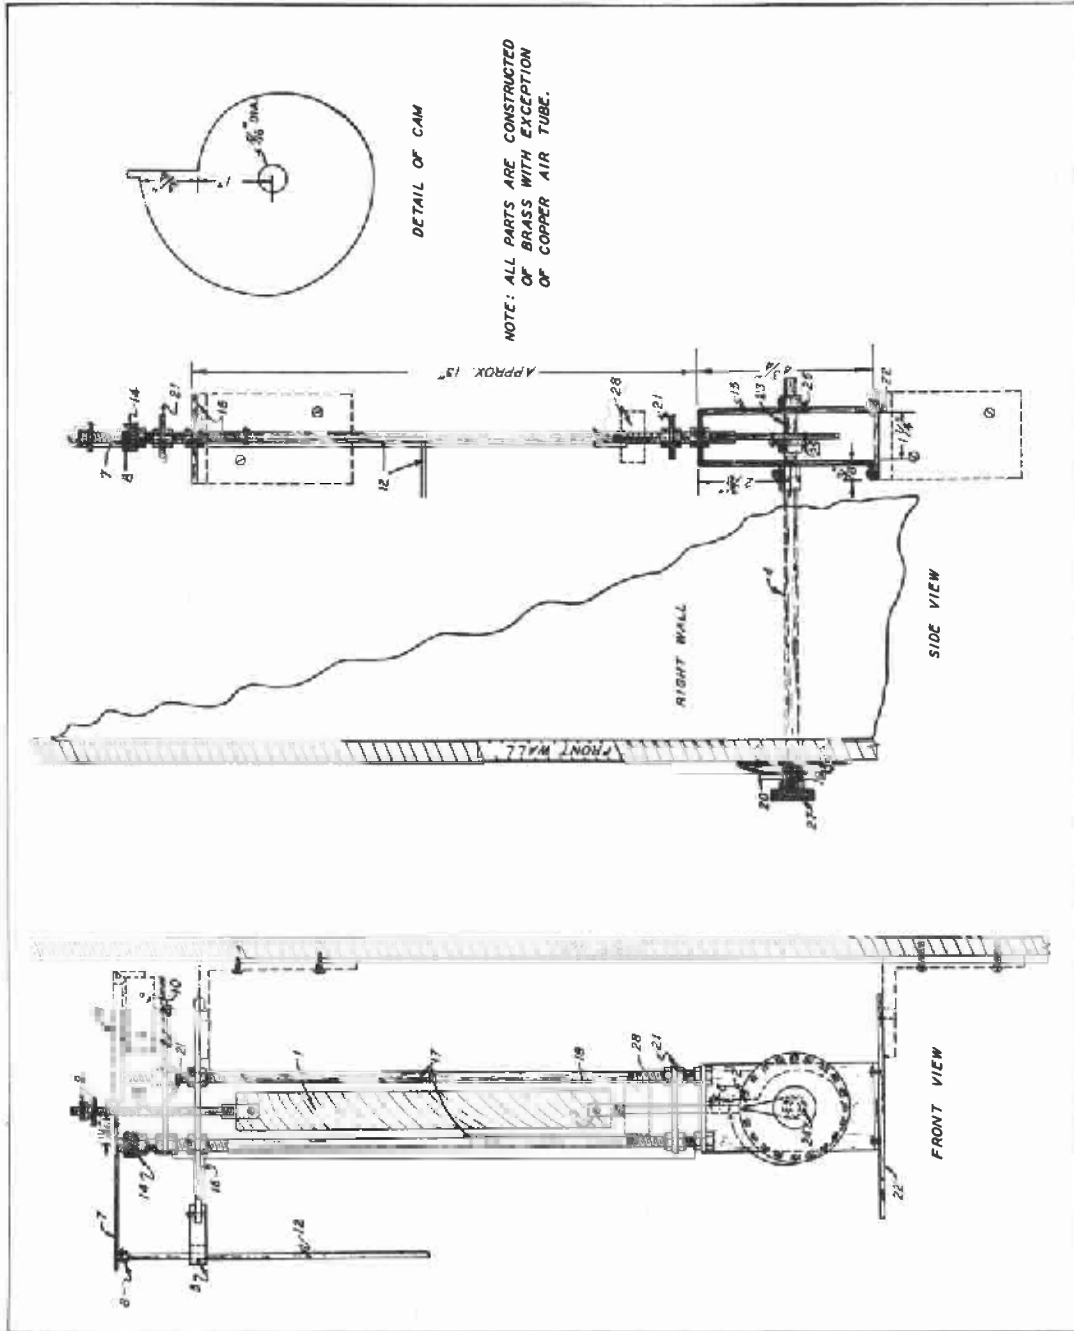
Detail drawing and method of mounting improved F.P.L. free-floating wood-element hygrometer, with necessary dimensions and part numbers for construction purposes. Parts correspond by number to those described in parts list in appendix.
